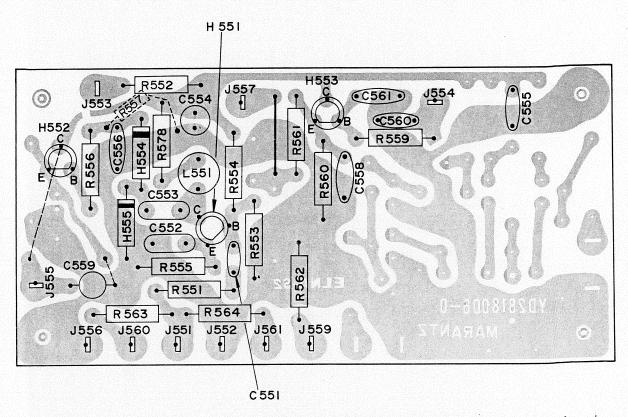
Muting Control Amplifier Assembly P550 Component Locations
